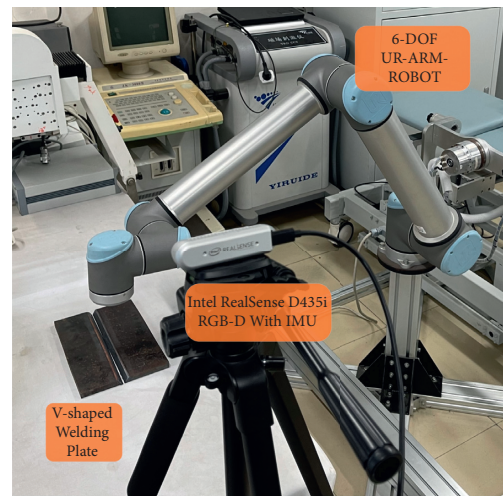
Diagram of welding plate, robot arm, and camera.
